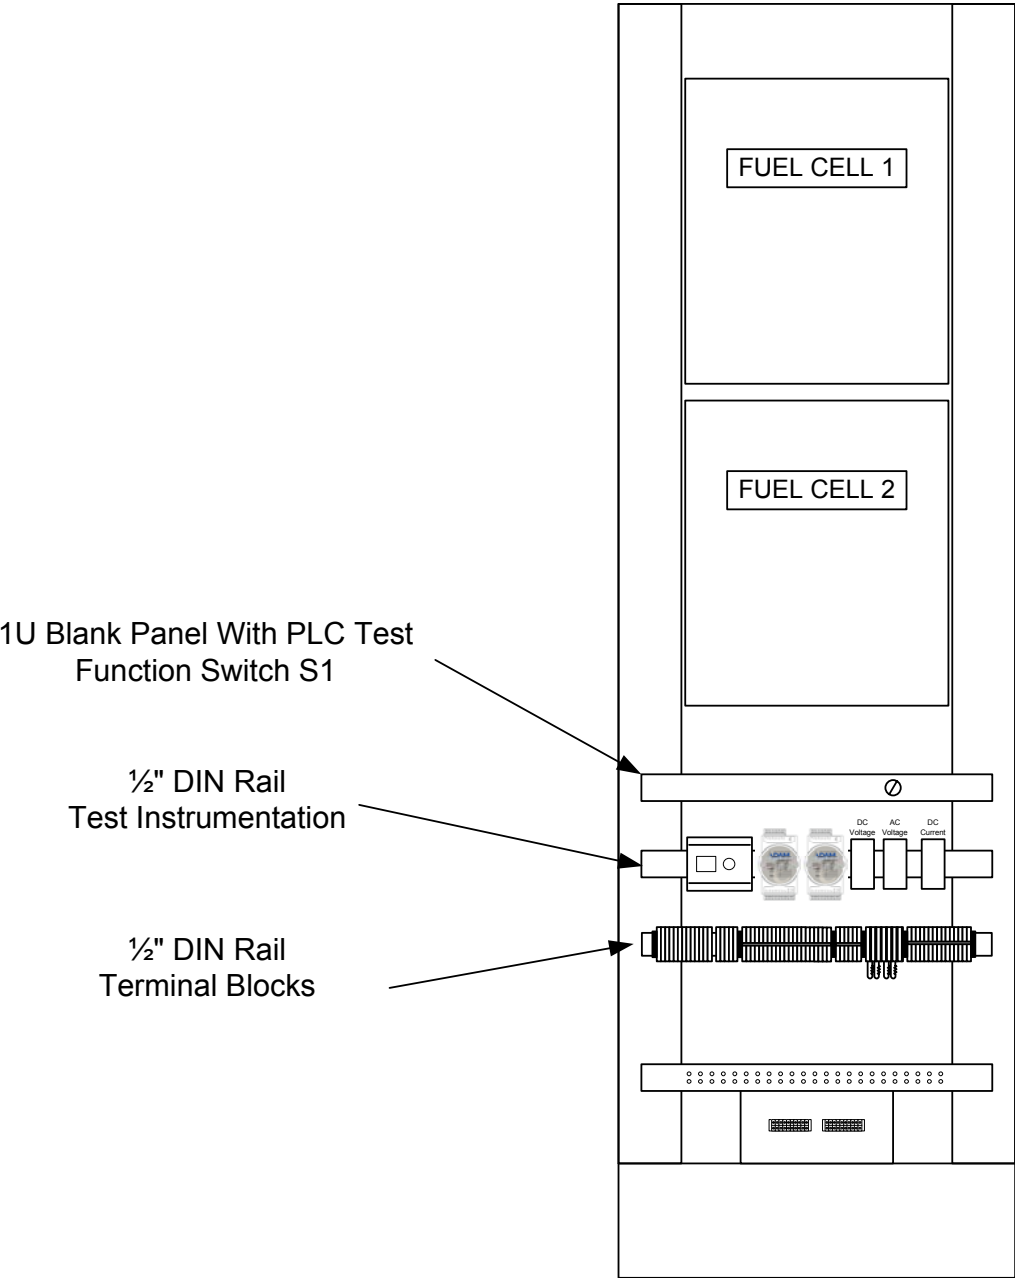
TEST INSTRUMENT DIN RAIL PLACEMENT
